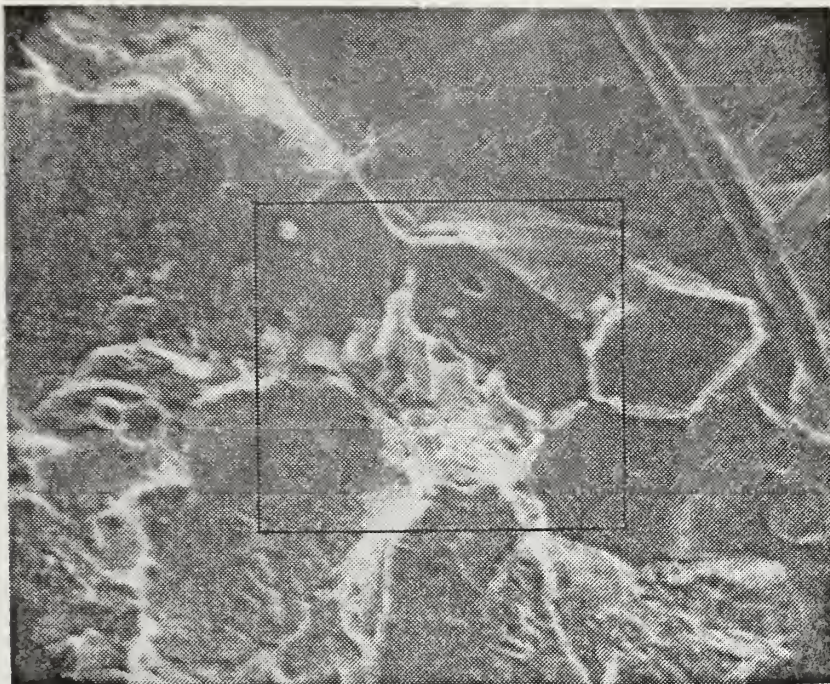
Fractograph of specimen QI-0-8 which was fractured after 212,400 cycles at 65 ksi, showing intergranular fracture (rock candy) and transgranular fracture. Dimples and cleavage facets on intergranular fracture surfaces are evident. X1000.
